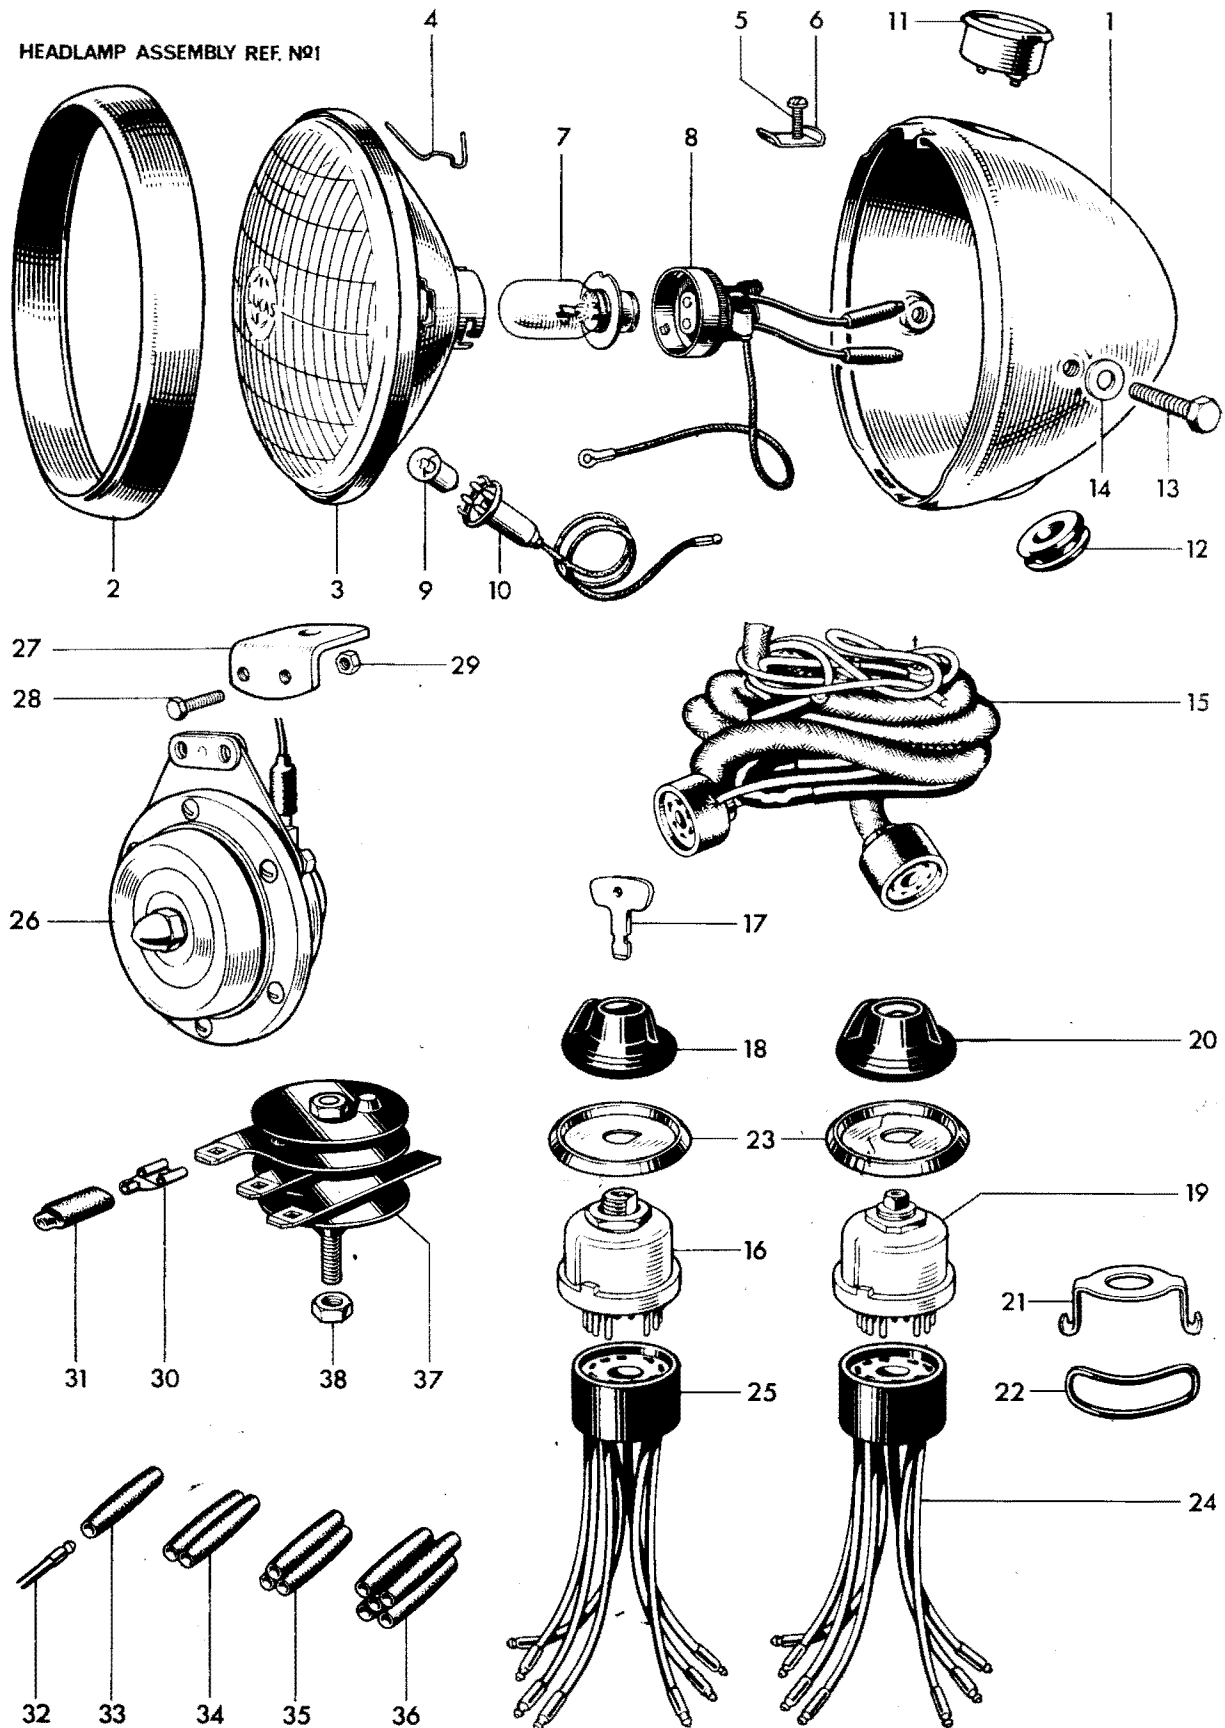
HEADLAMP, WIRING HARNESS, HORN AND RECTIFIER
